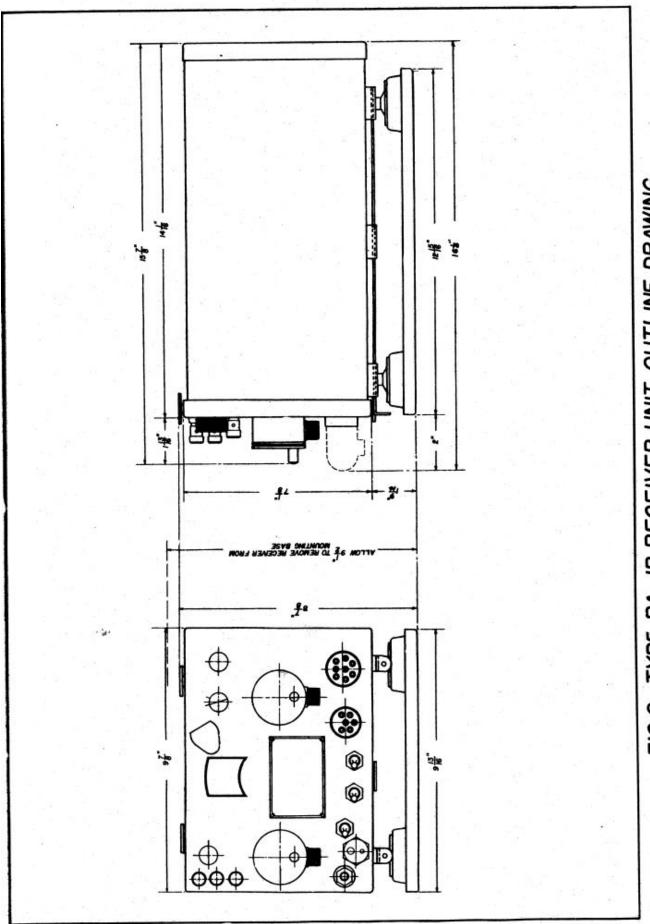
TYPE RA-IB RECEIVER UNIT OUTLINE DRAWING
